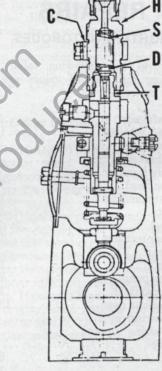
Cross-sectional view of Bosch PES fuel injection pump.
